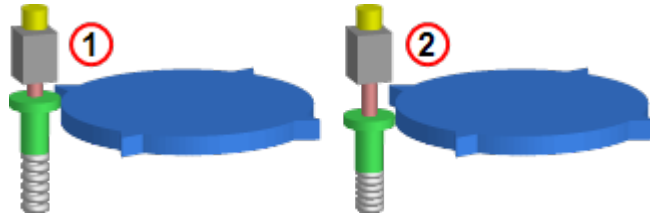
(1) The brake is engaged, (2) the solenoid is active, pushing the plunger clear of the brake.
